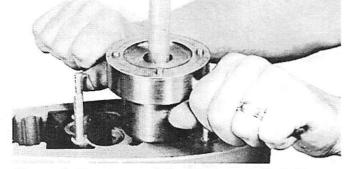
Removing and Installing Drive Shaft Bearing Retainer Cover
